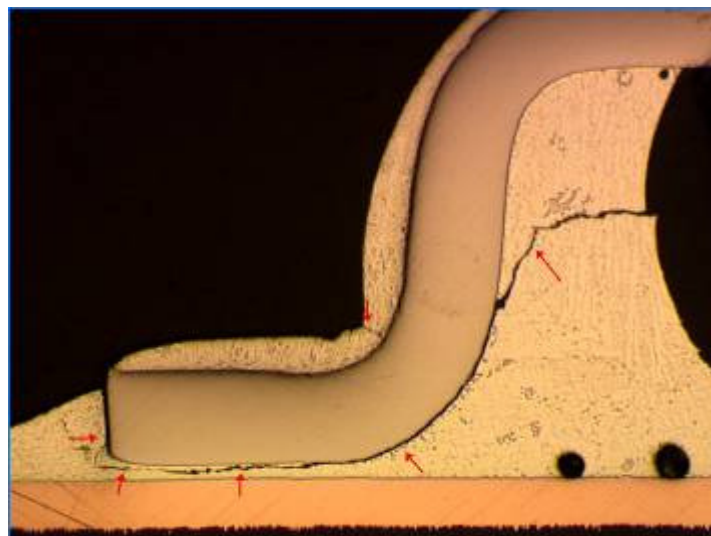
cross section, SN79, U12, left lead solder crack, 100x
